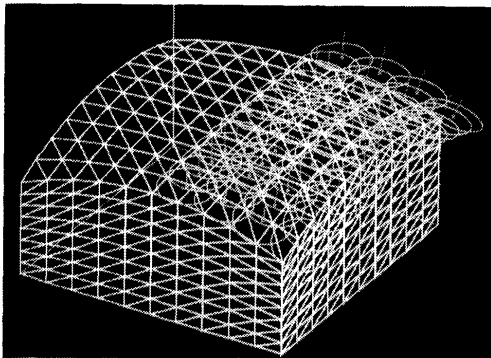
Defined workpiece shape with curved surface and polishing tool path
